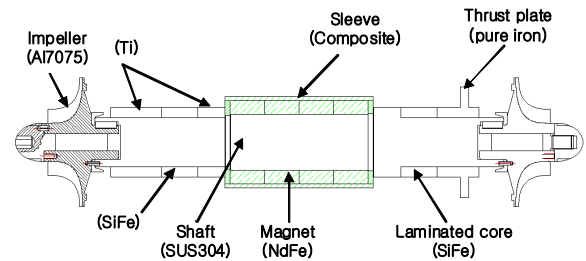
New design of rotor for turbo refrigerant compressor using magnetic bearings
